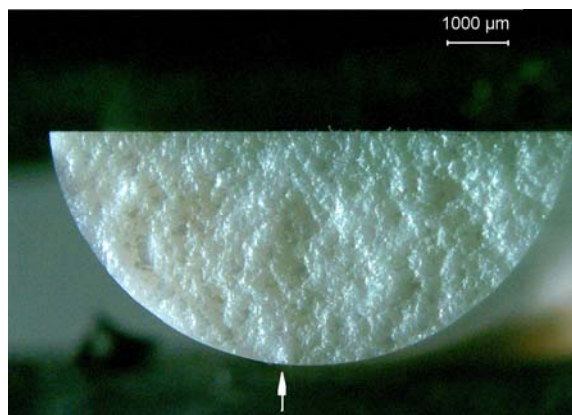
Optical fractograph showing the fracture surface of a broken split cylinder zirconia specimen. The arrow marks the fracture origin. Fractographic analyses was difficult in this material which had very rough fracture surfaces.
